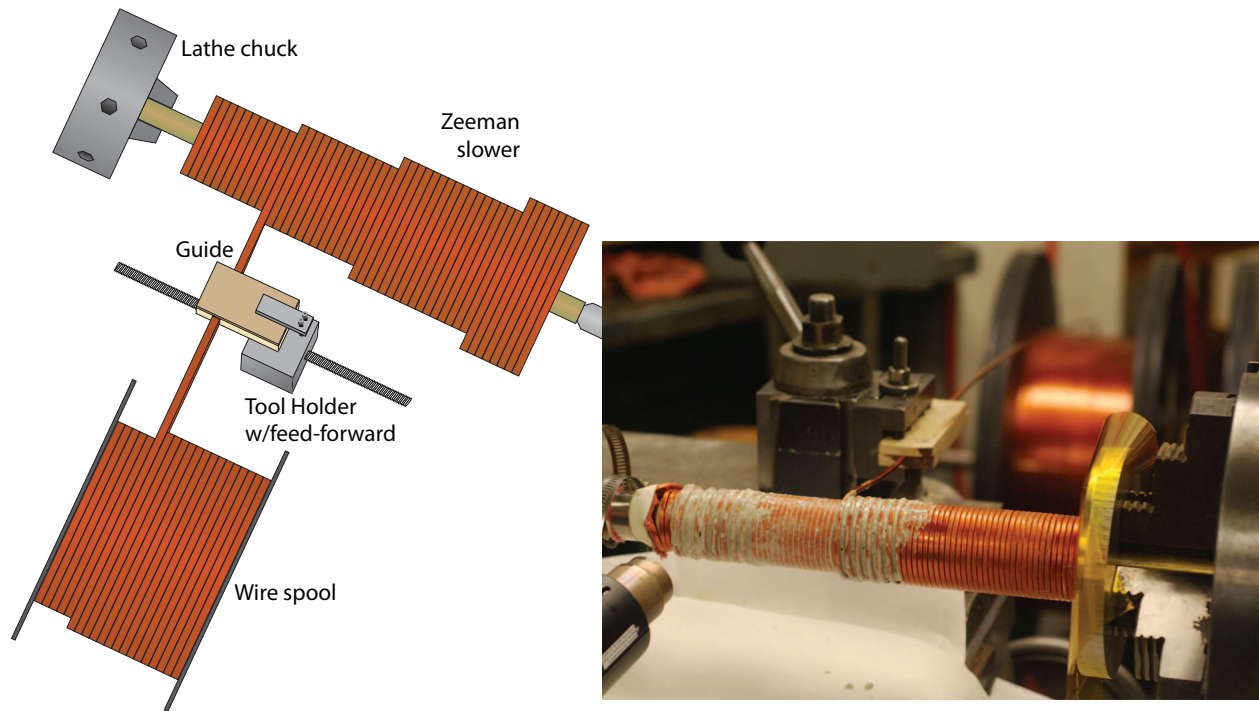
Schematic of slower coil winding. The wire is extracted directly from the spool. To guide the wire accurately on to the copper tube core, a wooden feedthrough is mounted on the tool holder, and smoothly translated  $1/8$ " per revolution. The lathe chuck (upper left) is rotated by hand, to achieve maximum control over the winding process. The inset shows the winding of a Zeeman slower for a different experiment, using the same techniques. The wooden guide and spool are visible in the background. The solenoid is partially covered in high-temperature epoxy (light gray).
